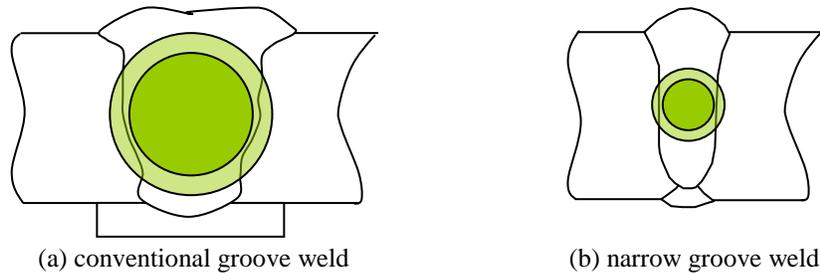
Schematic all-weld metal tensile specimen location, round bar
